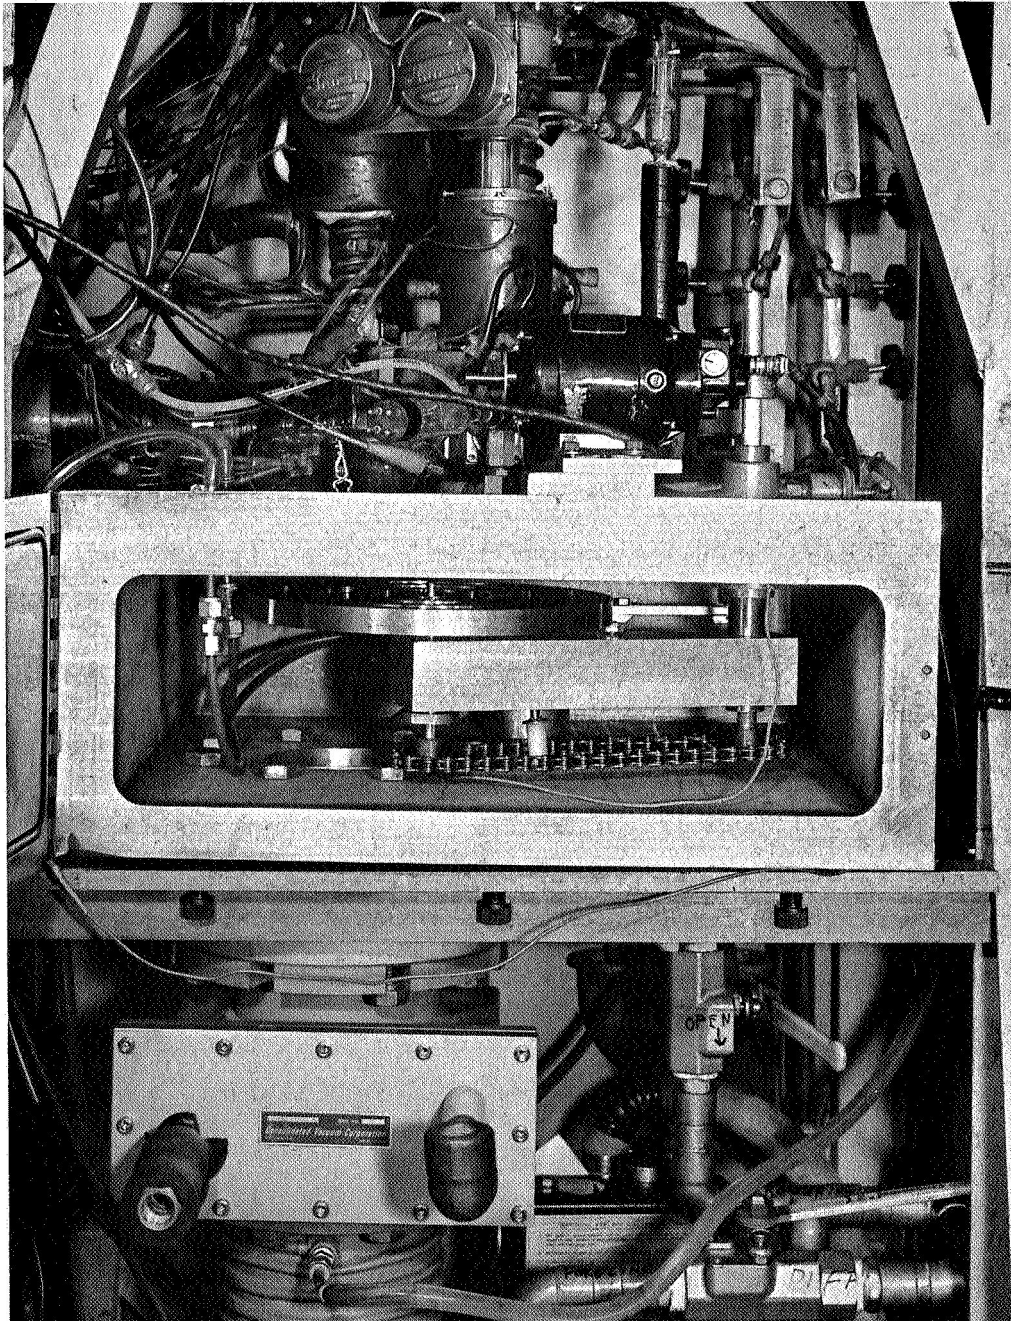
Welding Chamber Attached to 10 KVA Laboratory Out-of-Vacuum Welder
